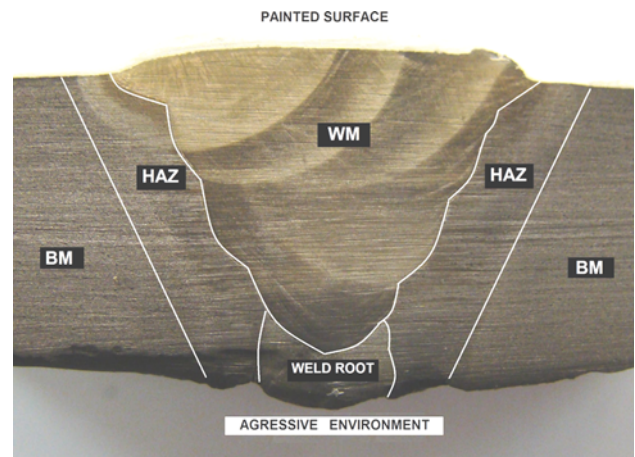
Girth weld profile showing base metal (MB), heat-affected zone (HAZ), weld metal (WM), and weld root (etched, 10% H₂SO₄ aqueous solution)
